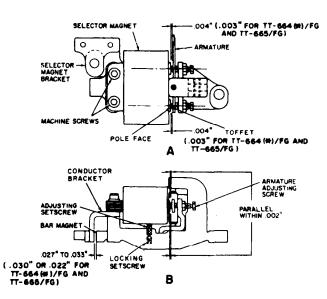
Selector magnet pole faces and armature alignment requirements.
